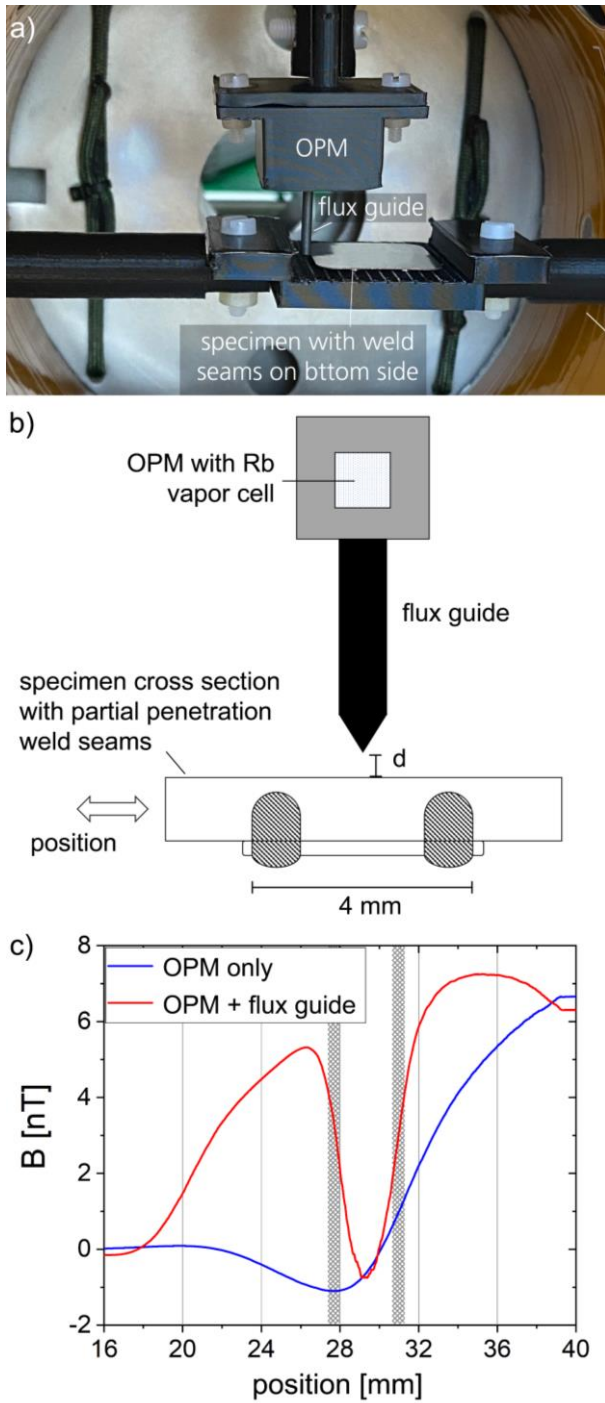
Detection of two partial penetration weld seams separated by 4 mm. A): image of the setup with OPM, flux guide and specimen. B) sketch of OPM with Rb vapor cell, flux guide, and cross section of a moving specimen with weld seams. C) distribution of magnetic stray field B measured with (red) and without flux guide (blue).
